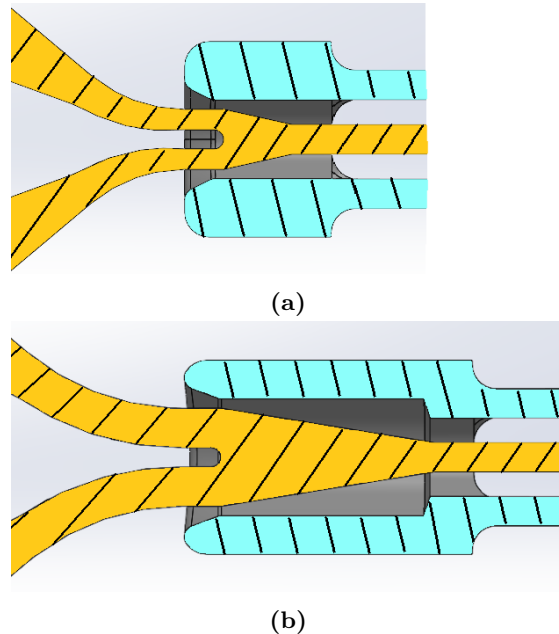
Grasper cross-sections, with the grasper stem in orange, and the grasper bearing in blue. a) Detailed design. b) Improved design.
